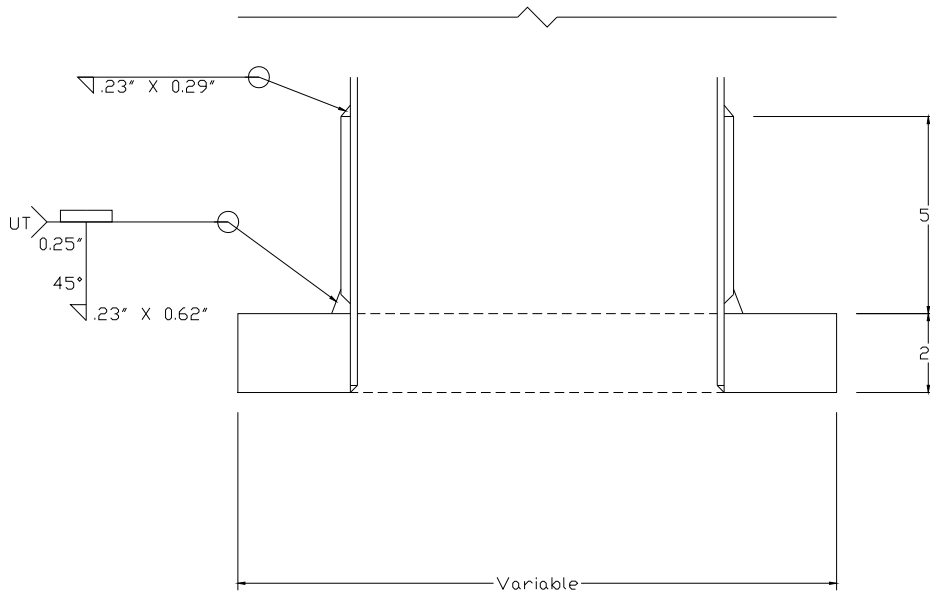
Close Up of Full Penetration Weld
